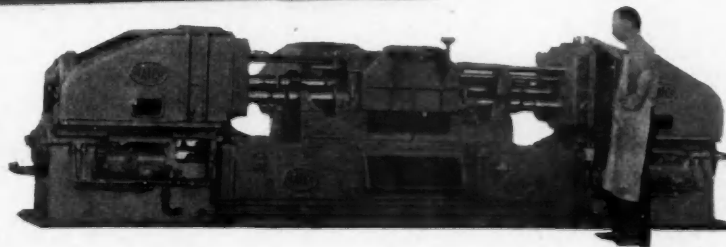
The three-way driller at the left is used to drill holes simultaneously in the front, rear and top of a crankcase
